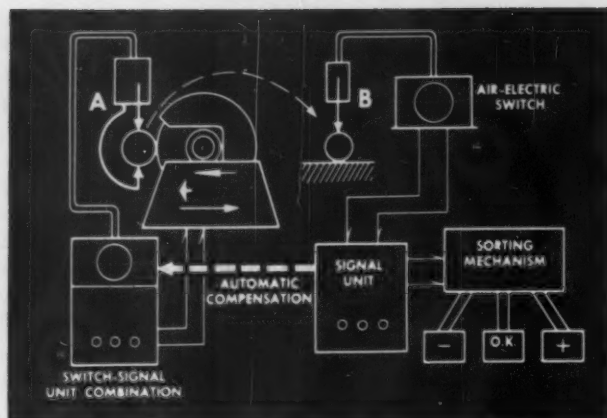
In combination gaging, when a prescribed number of pieces have exceeded either marginal tolerance limit, post-process gage (B) signals in-process gage (A) to correct the wheel-retraction setting.
